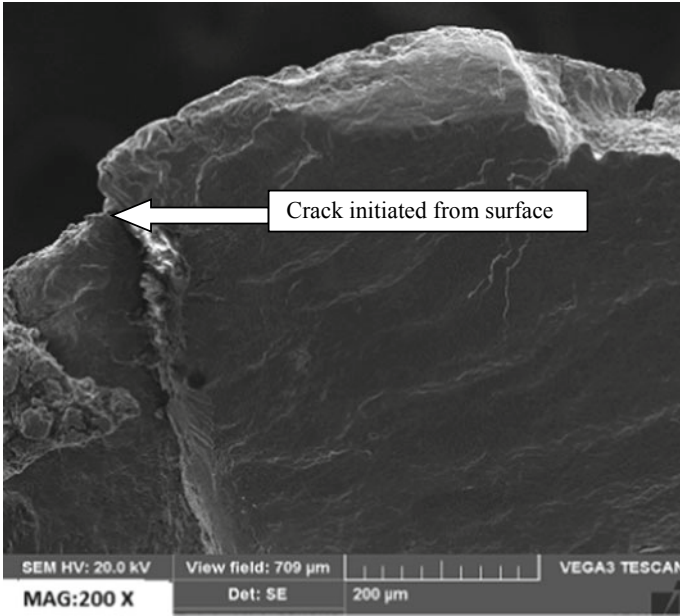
Fractograph of nitrided (HT-N) H13 steel indicating crack initiation region
